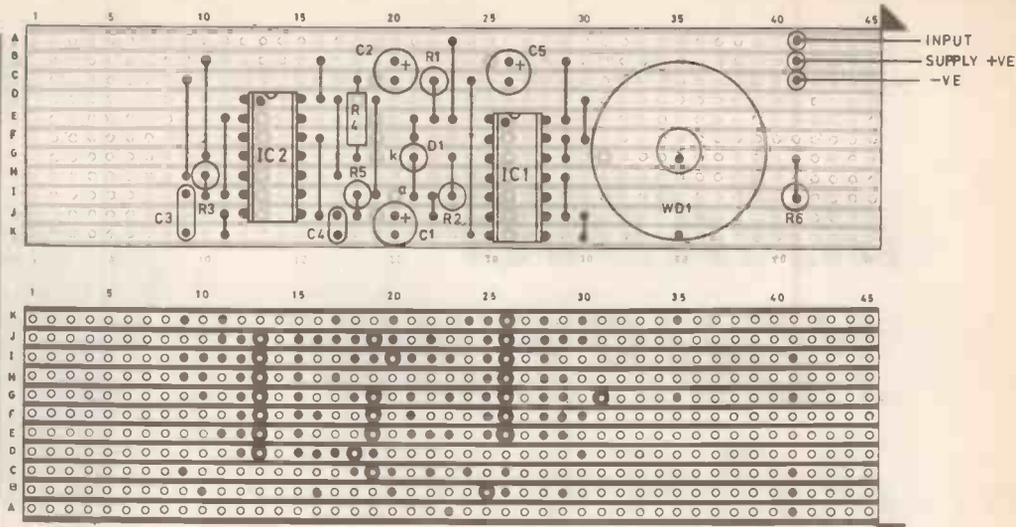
Two-Tone Siren Alarm stripboard component layout and underside copper break details.
